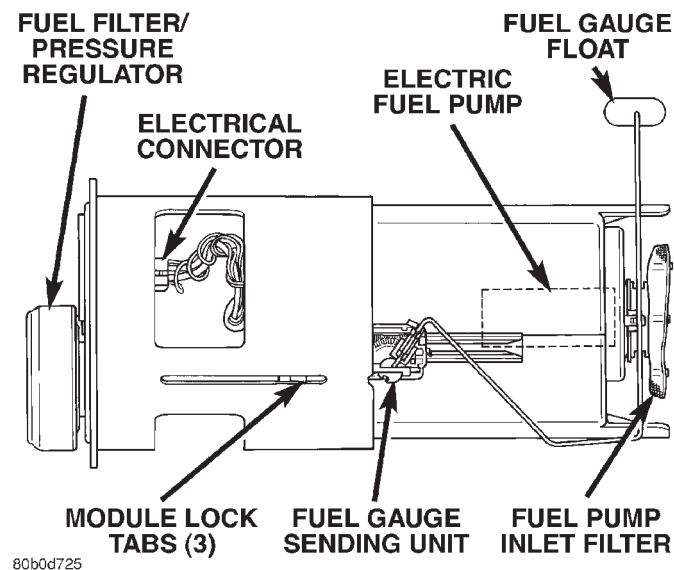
Fuel Gauge Sending Unit Location—TYPICAL Module
